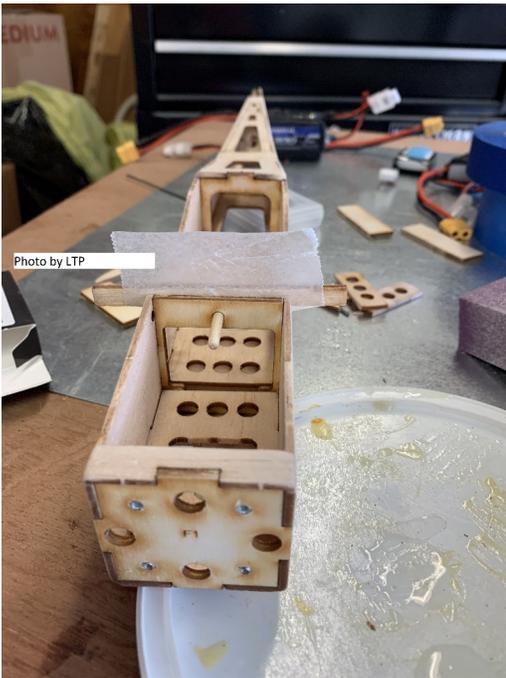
& 8 - Aligning Wing – Gluing Leading Edge Mount to wing
